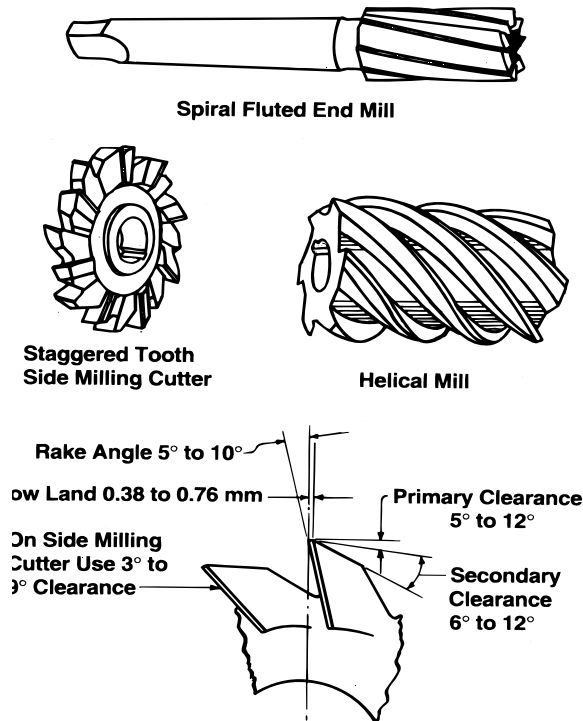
Typical milling cutters used for stainless steels, with suggested geometries.
